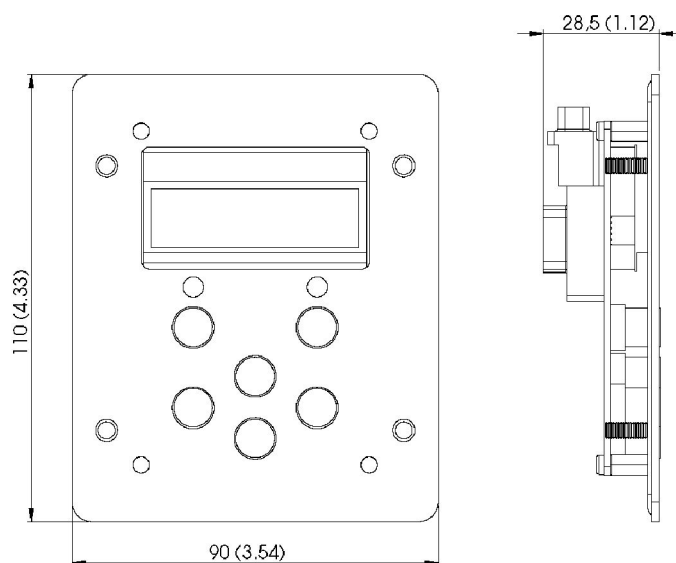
Dimensions of the operating terminal 0362153 in mm (inch)
